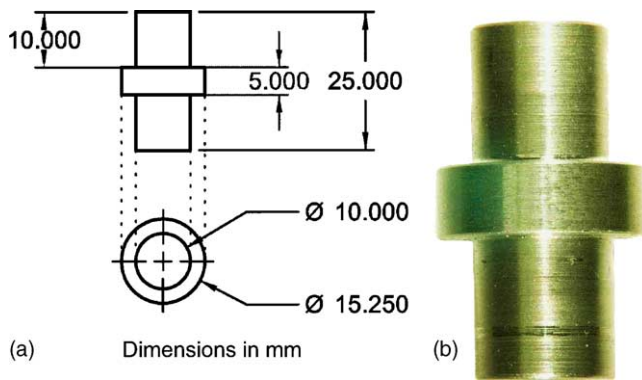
Pre-bulged flanged test sample: (a) dimensions; (b) actual sample.
